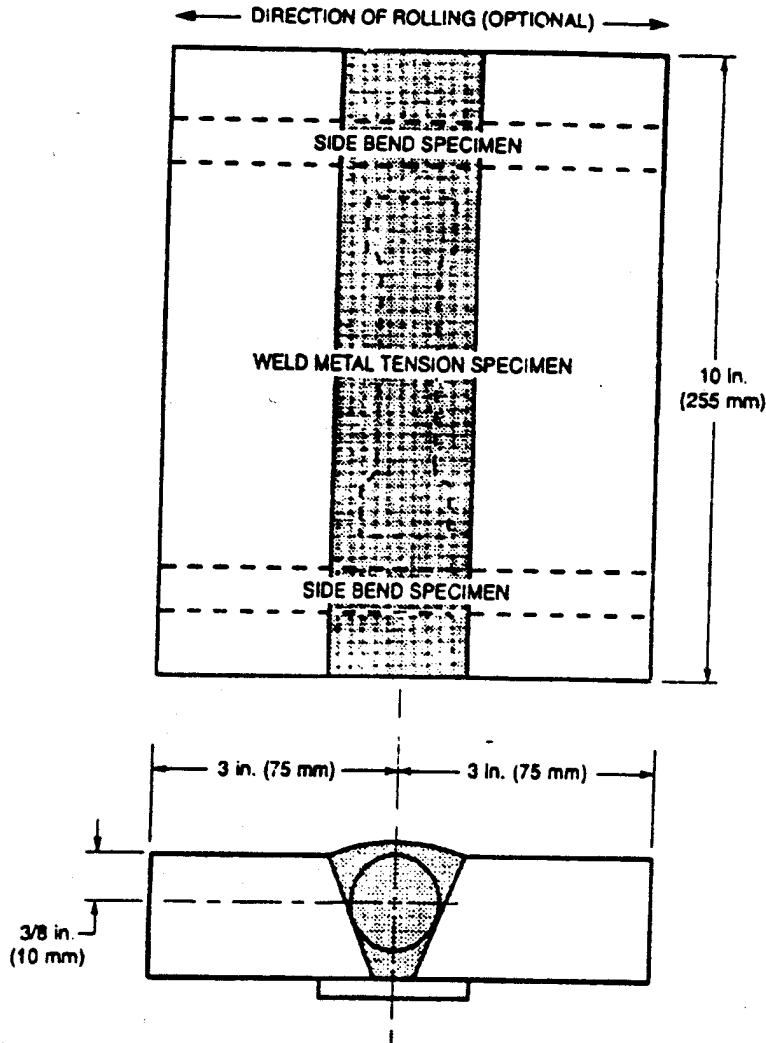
Location of Test Specimen on Welded Test Plate 1 in. (25.4 mm) Thick—
